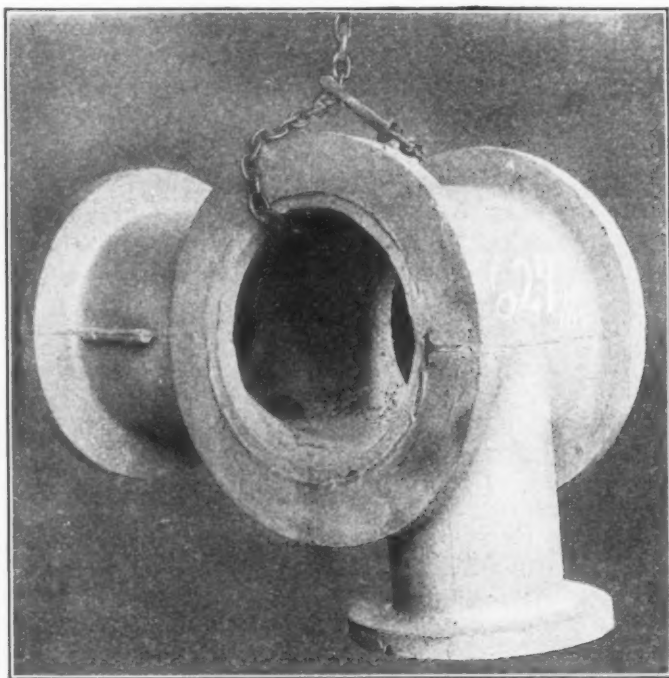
88-10-2 Casting showing Test Specimen Attached.
